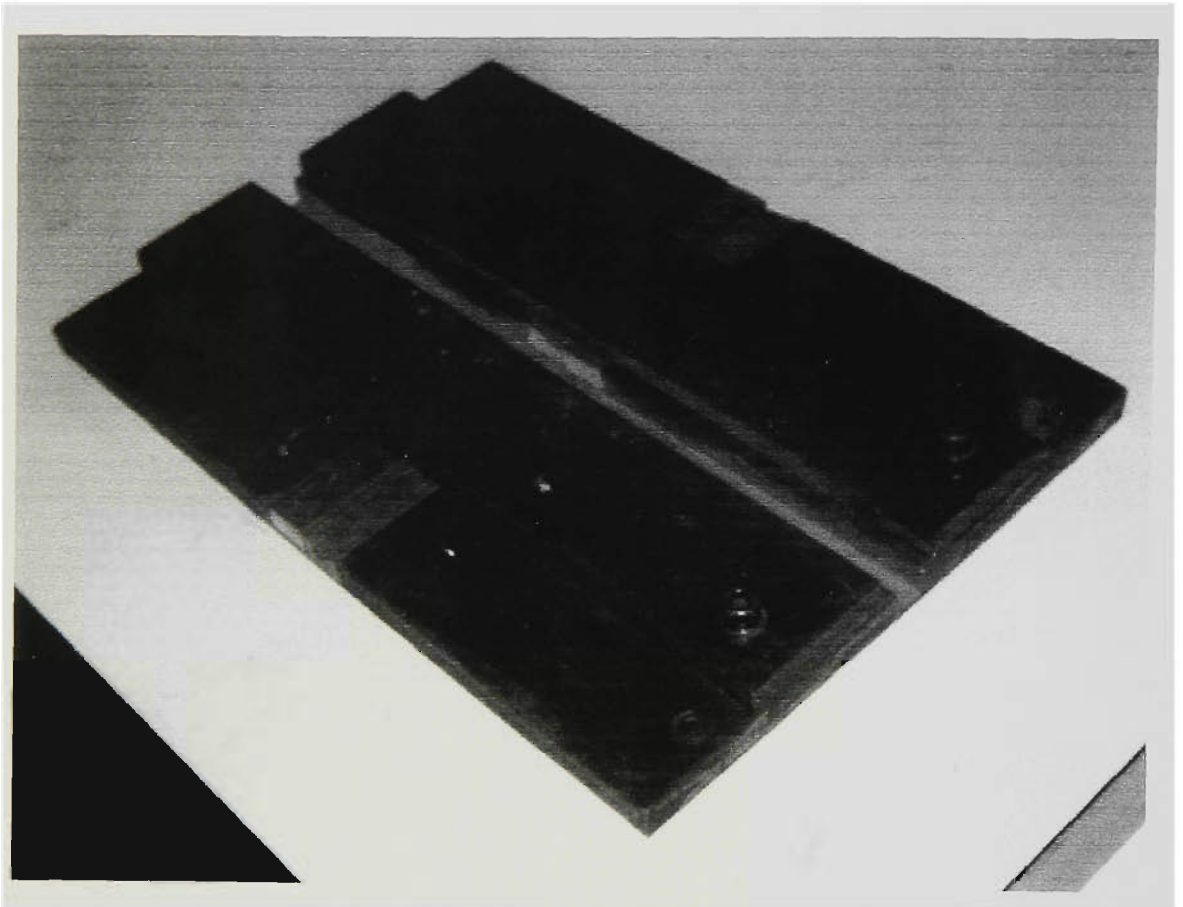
Photograph showing the jig used for GMAW and FCAW.
